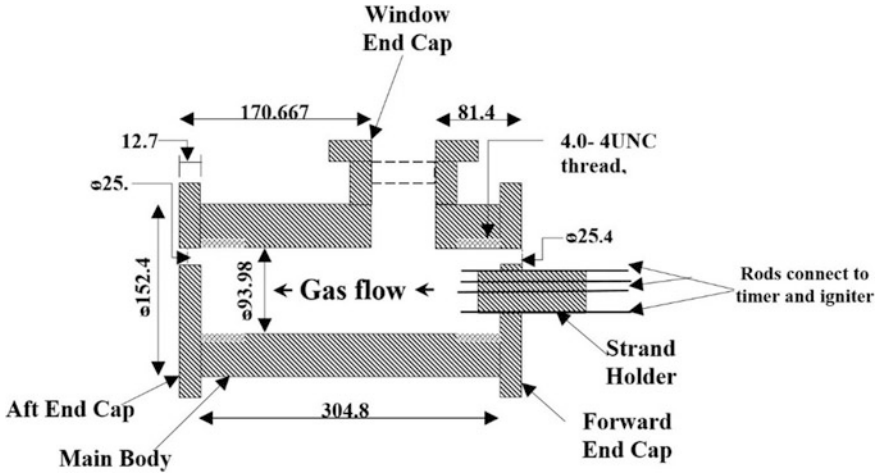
Test system design including strand burner assembly and strand holder in mm
